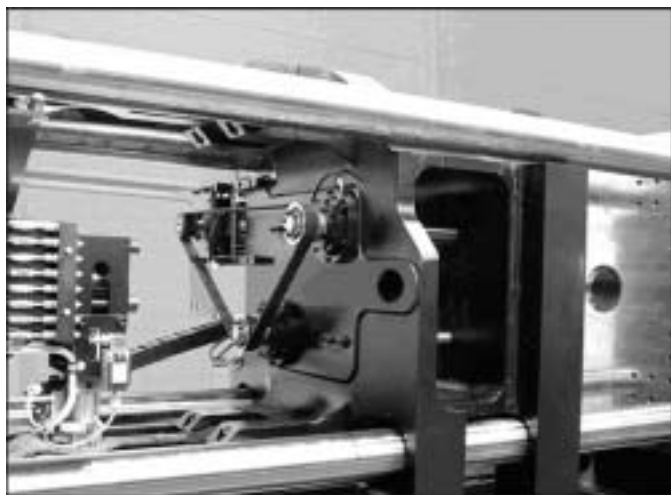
Classical three-plate tie-bar clamping unit: 1 — frame of injection molding machine, 2 — guides, 3 — link mechanism, 4 — guide-screw with ball nut, 5 — electric motor, 6 — mold height adjustment, 7 — ejector [13] (see text)
